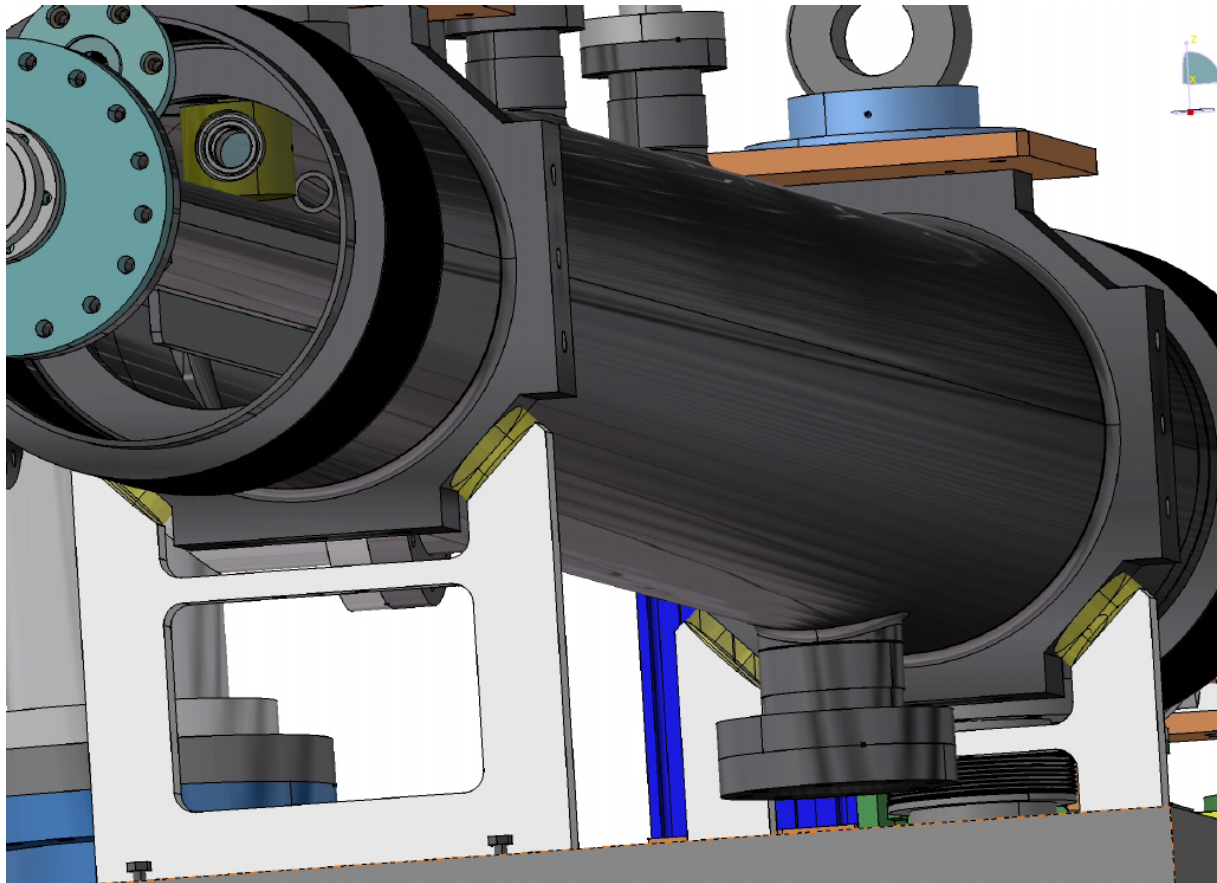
Technical drawing of cavity vessel mount. From [10].
